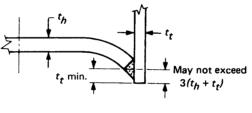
TYPICAL WATER HEATER WELDED JOINTS (CONT'D)
